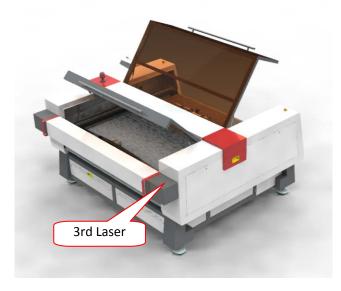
Mounting Position of CMA1814C-FS Laser Tube
